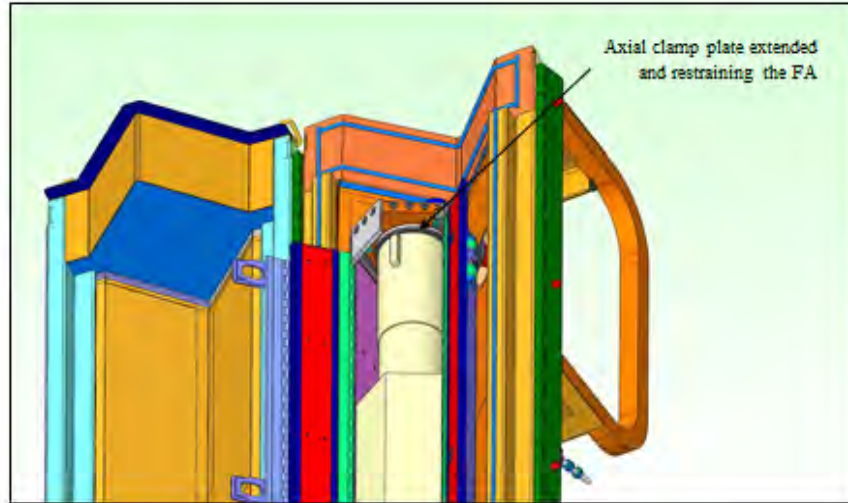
VVER Fuel Assembly Installed - Top Nozzle Region
